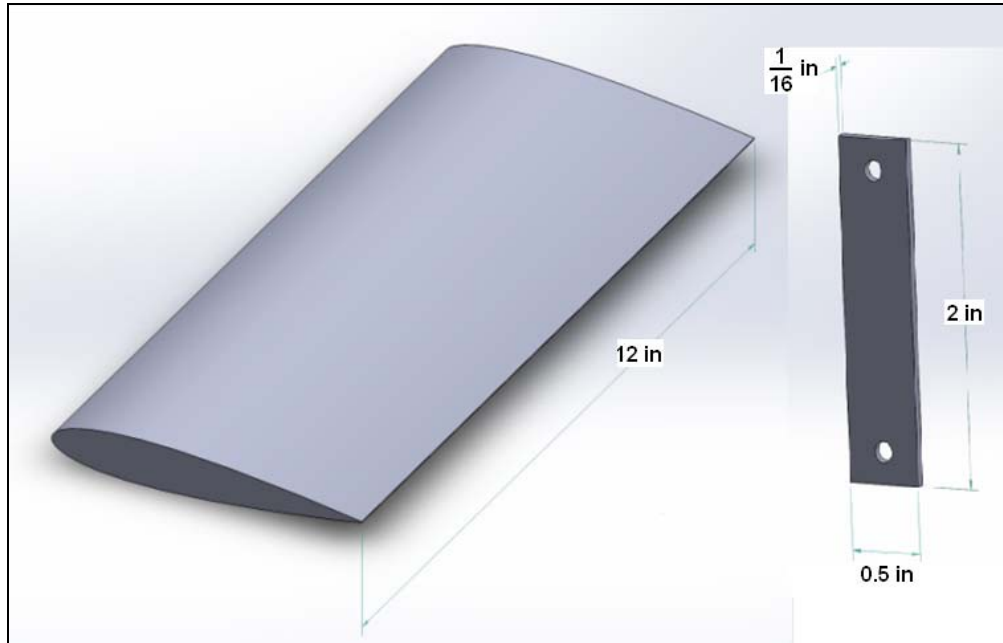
SOLIDWORKS drawing of the airfoil and plate support
